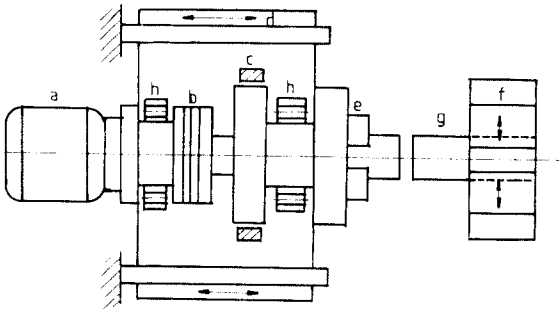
Schematic mechanism of friction welding machine (Continuous drive brake type)
